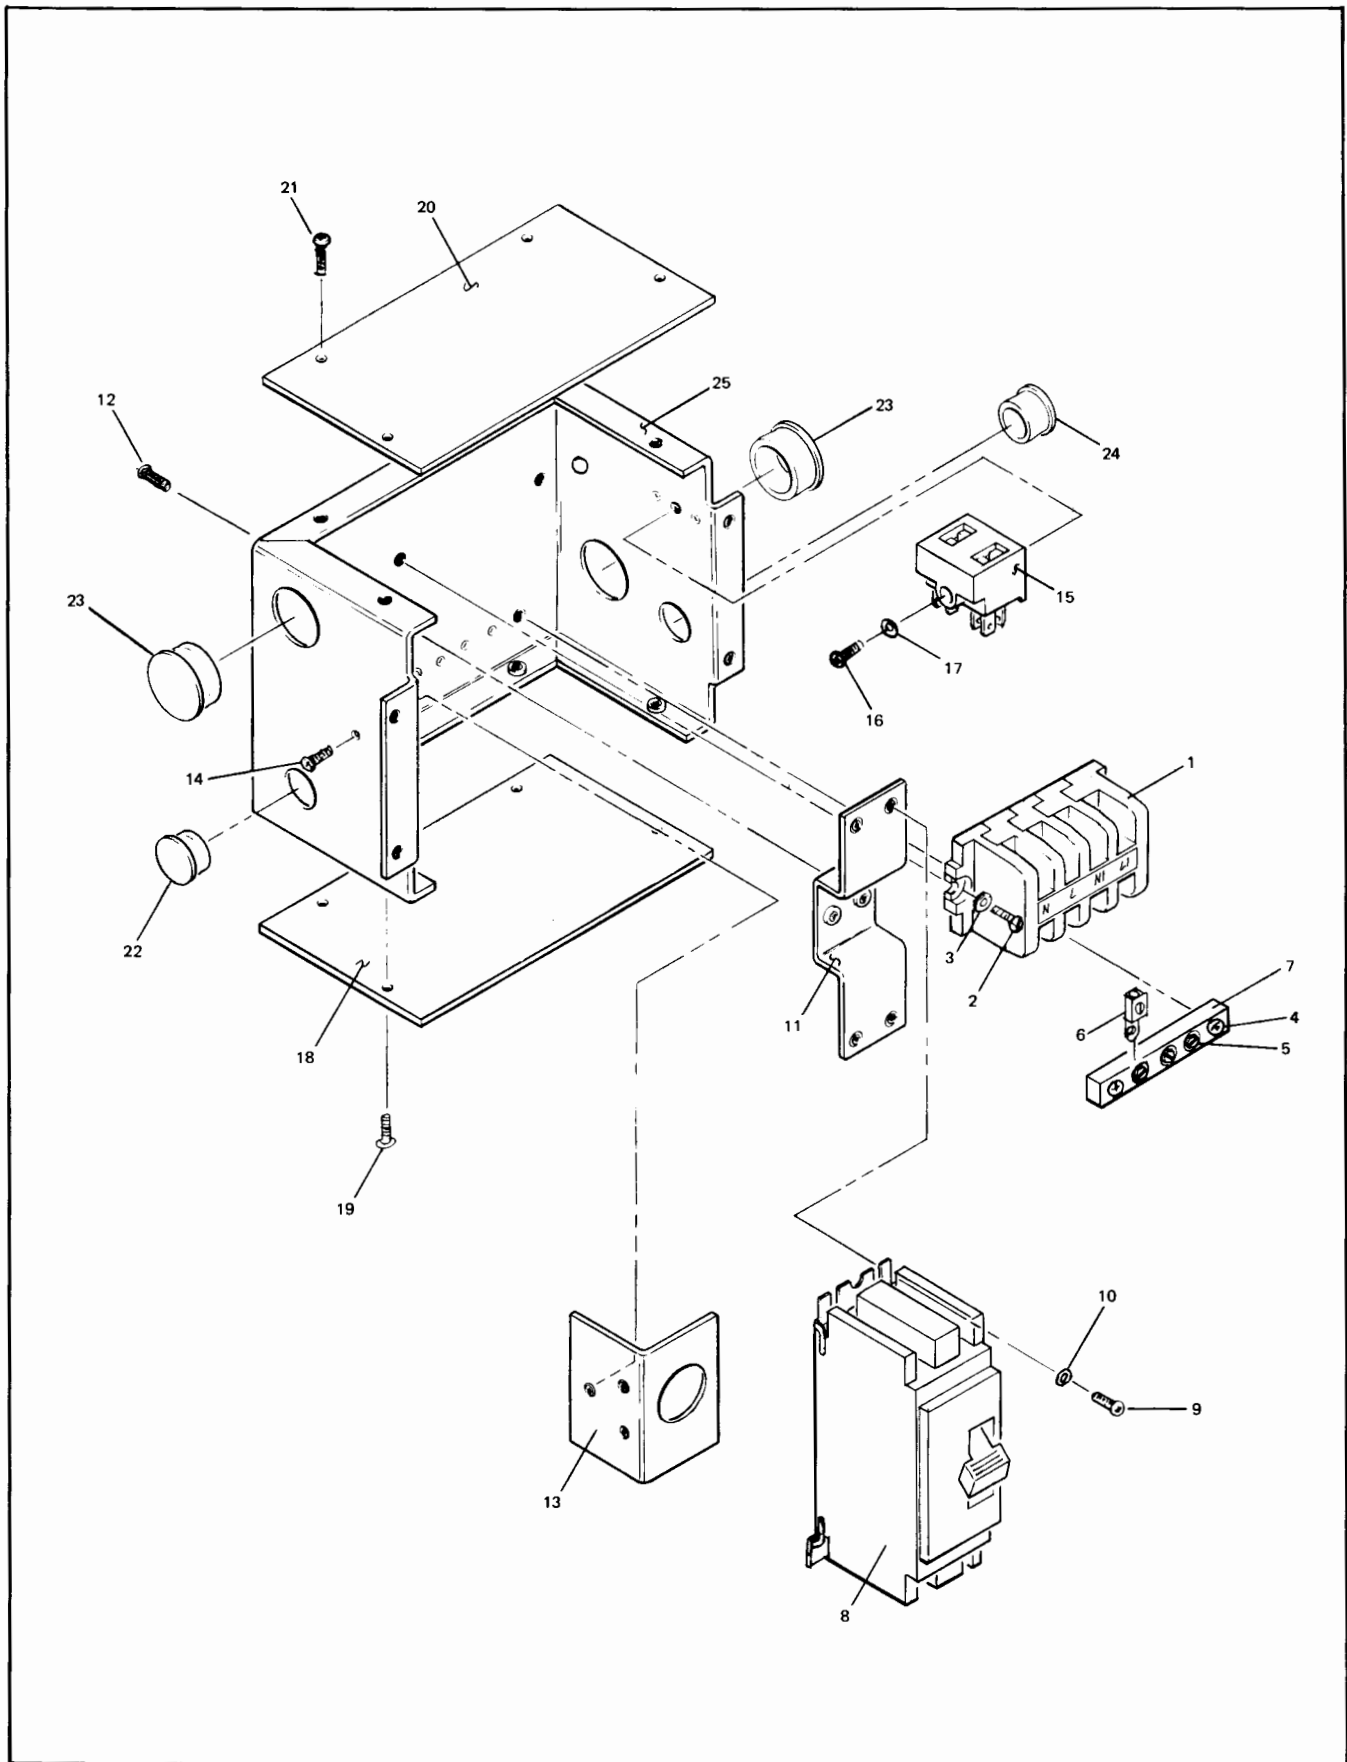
Power Distribution Unit (Part no. 02940-60130), Exploded View
